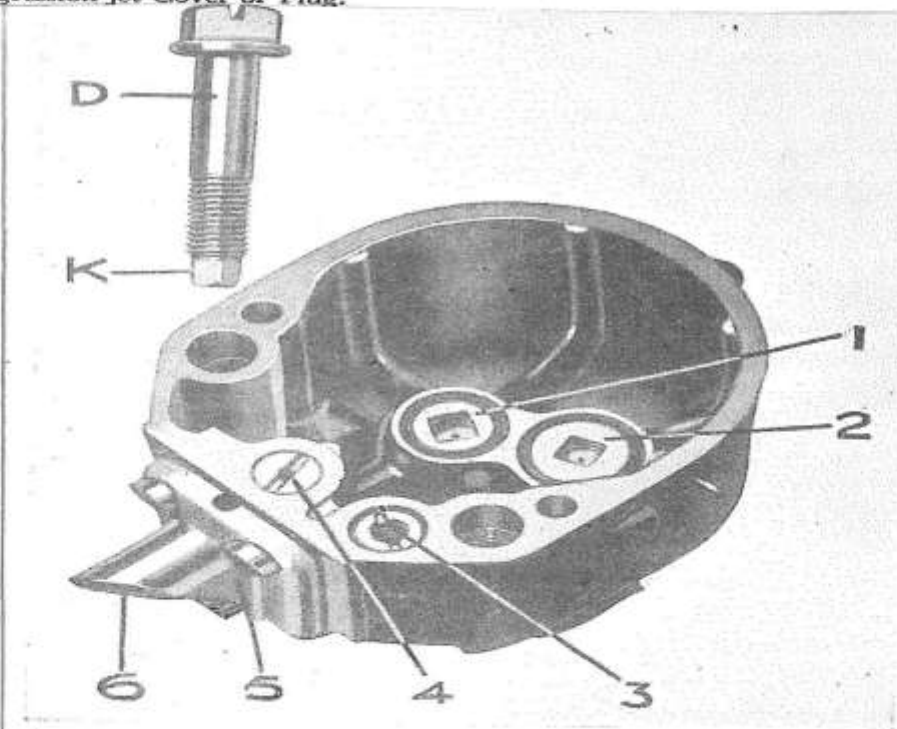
Showing Jet Chamber of Zenith "V"-type Carburettor.
